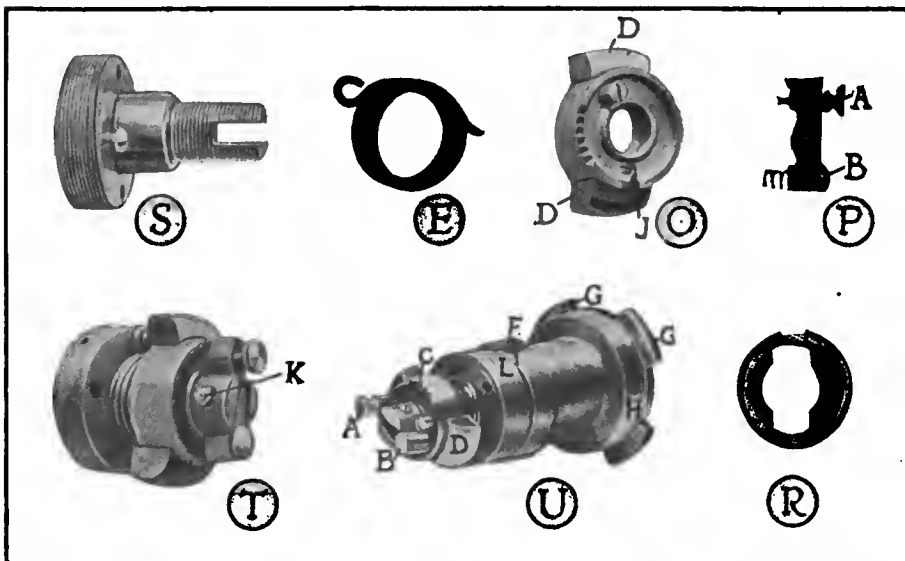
Parts of fixed hub and locking-mechanism of Helios demountable wire wheel
